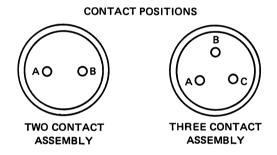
Cable-Connector Assembly (Sheet 1 of 2)
